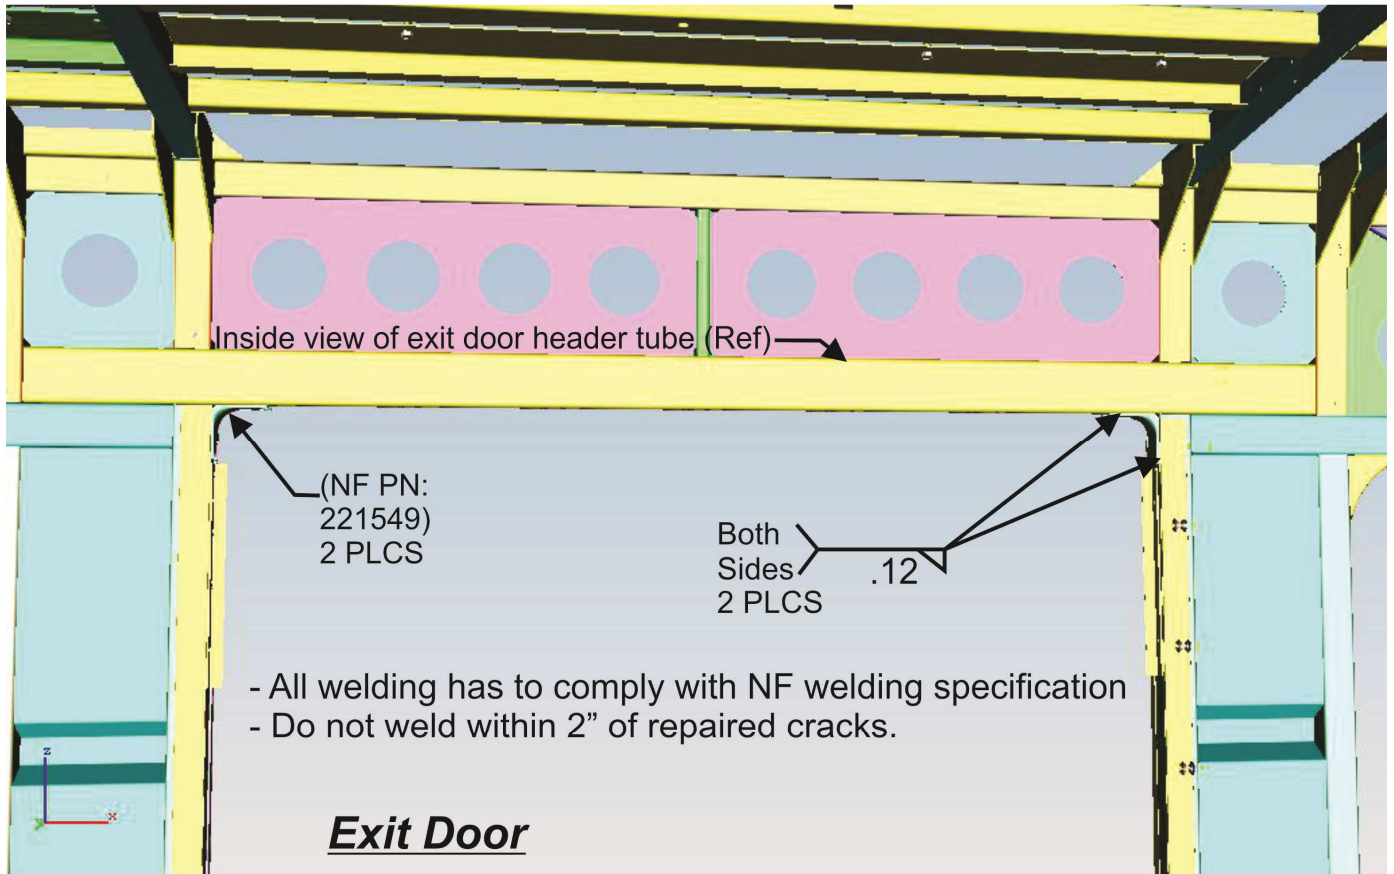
A: SHOWN PICTURES OF CRACKED STRUCTURE. THERE WILL BE 2 OPTIONS: DRILL STOP, V-GROOVE AND WELD FROM THE OUTSIDE OR SAME PROCEDURE TO BE COMPLETED FROM THE INSIDE OF THE TUBE (WITH A WINDOW OPEN UP AND WELD CLOSED AFTER WELD COMPLETED). THIS WILL DEPEND ON HOW FAR THE CRACK SPREADS ON THE TUBE SURFACE.
